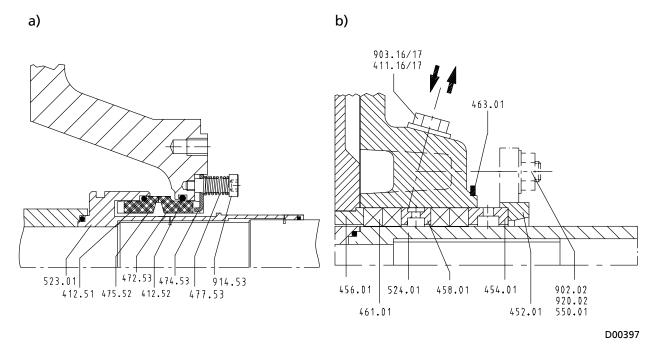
a) 4K mechanical seal; b) coolable gland packing
